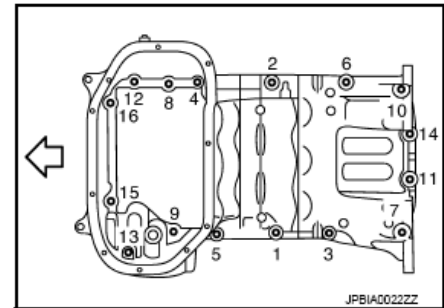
Identifying Oil Pan (Upper) Bolts Tightening Sequence
